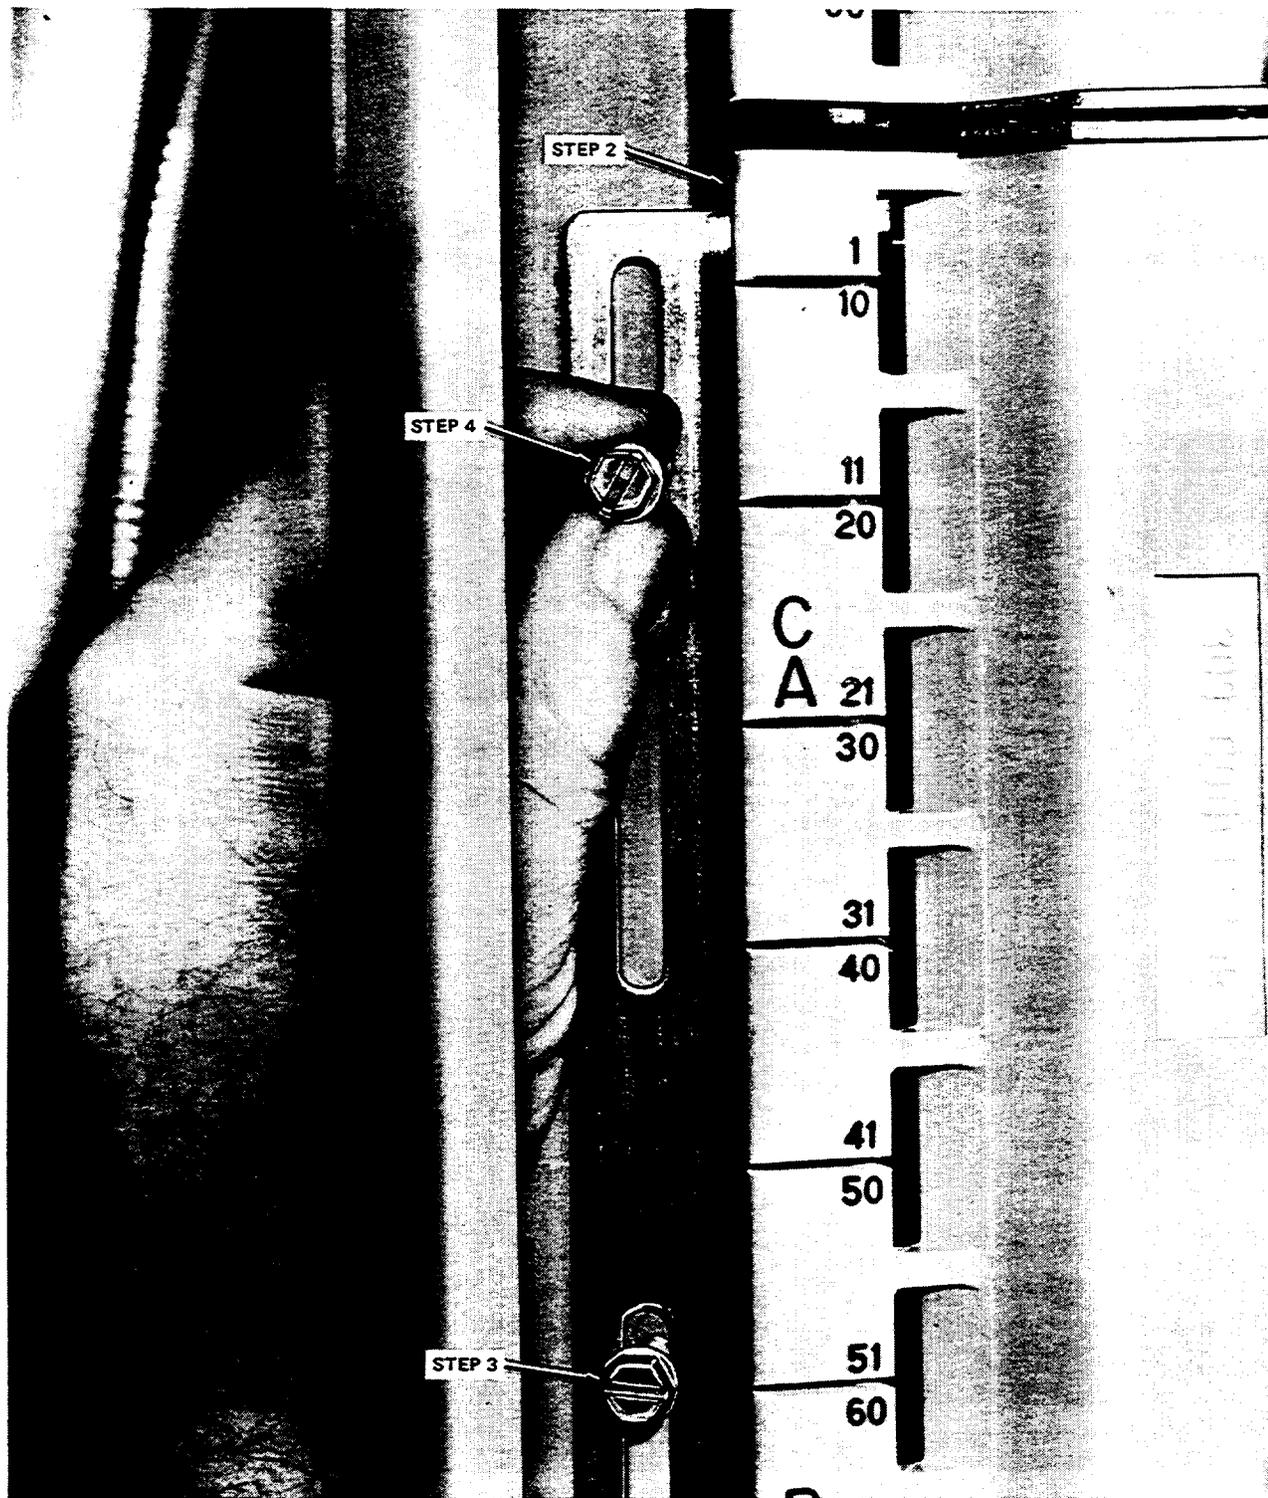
Aligning Mounting Screws Onto Frame (Left Connector)
